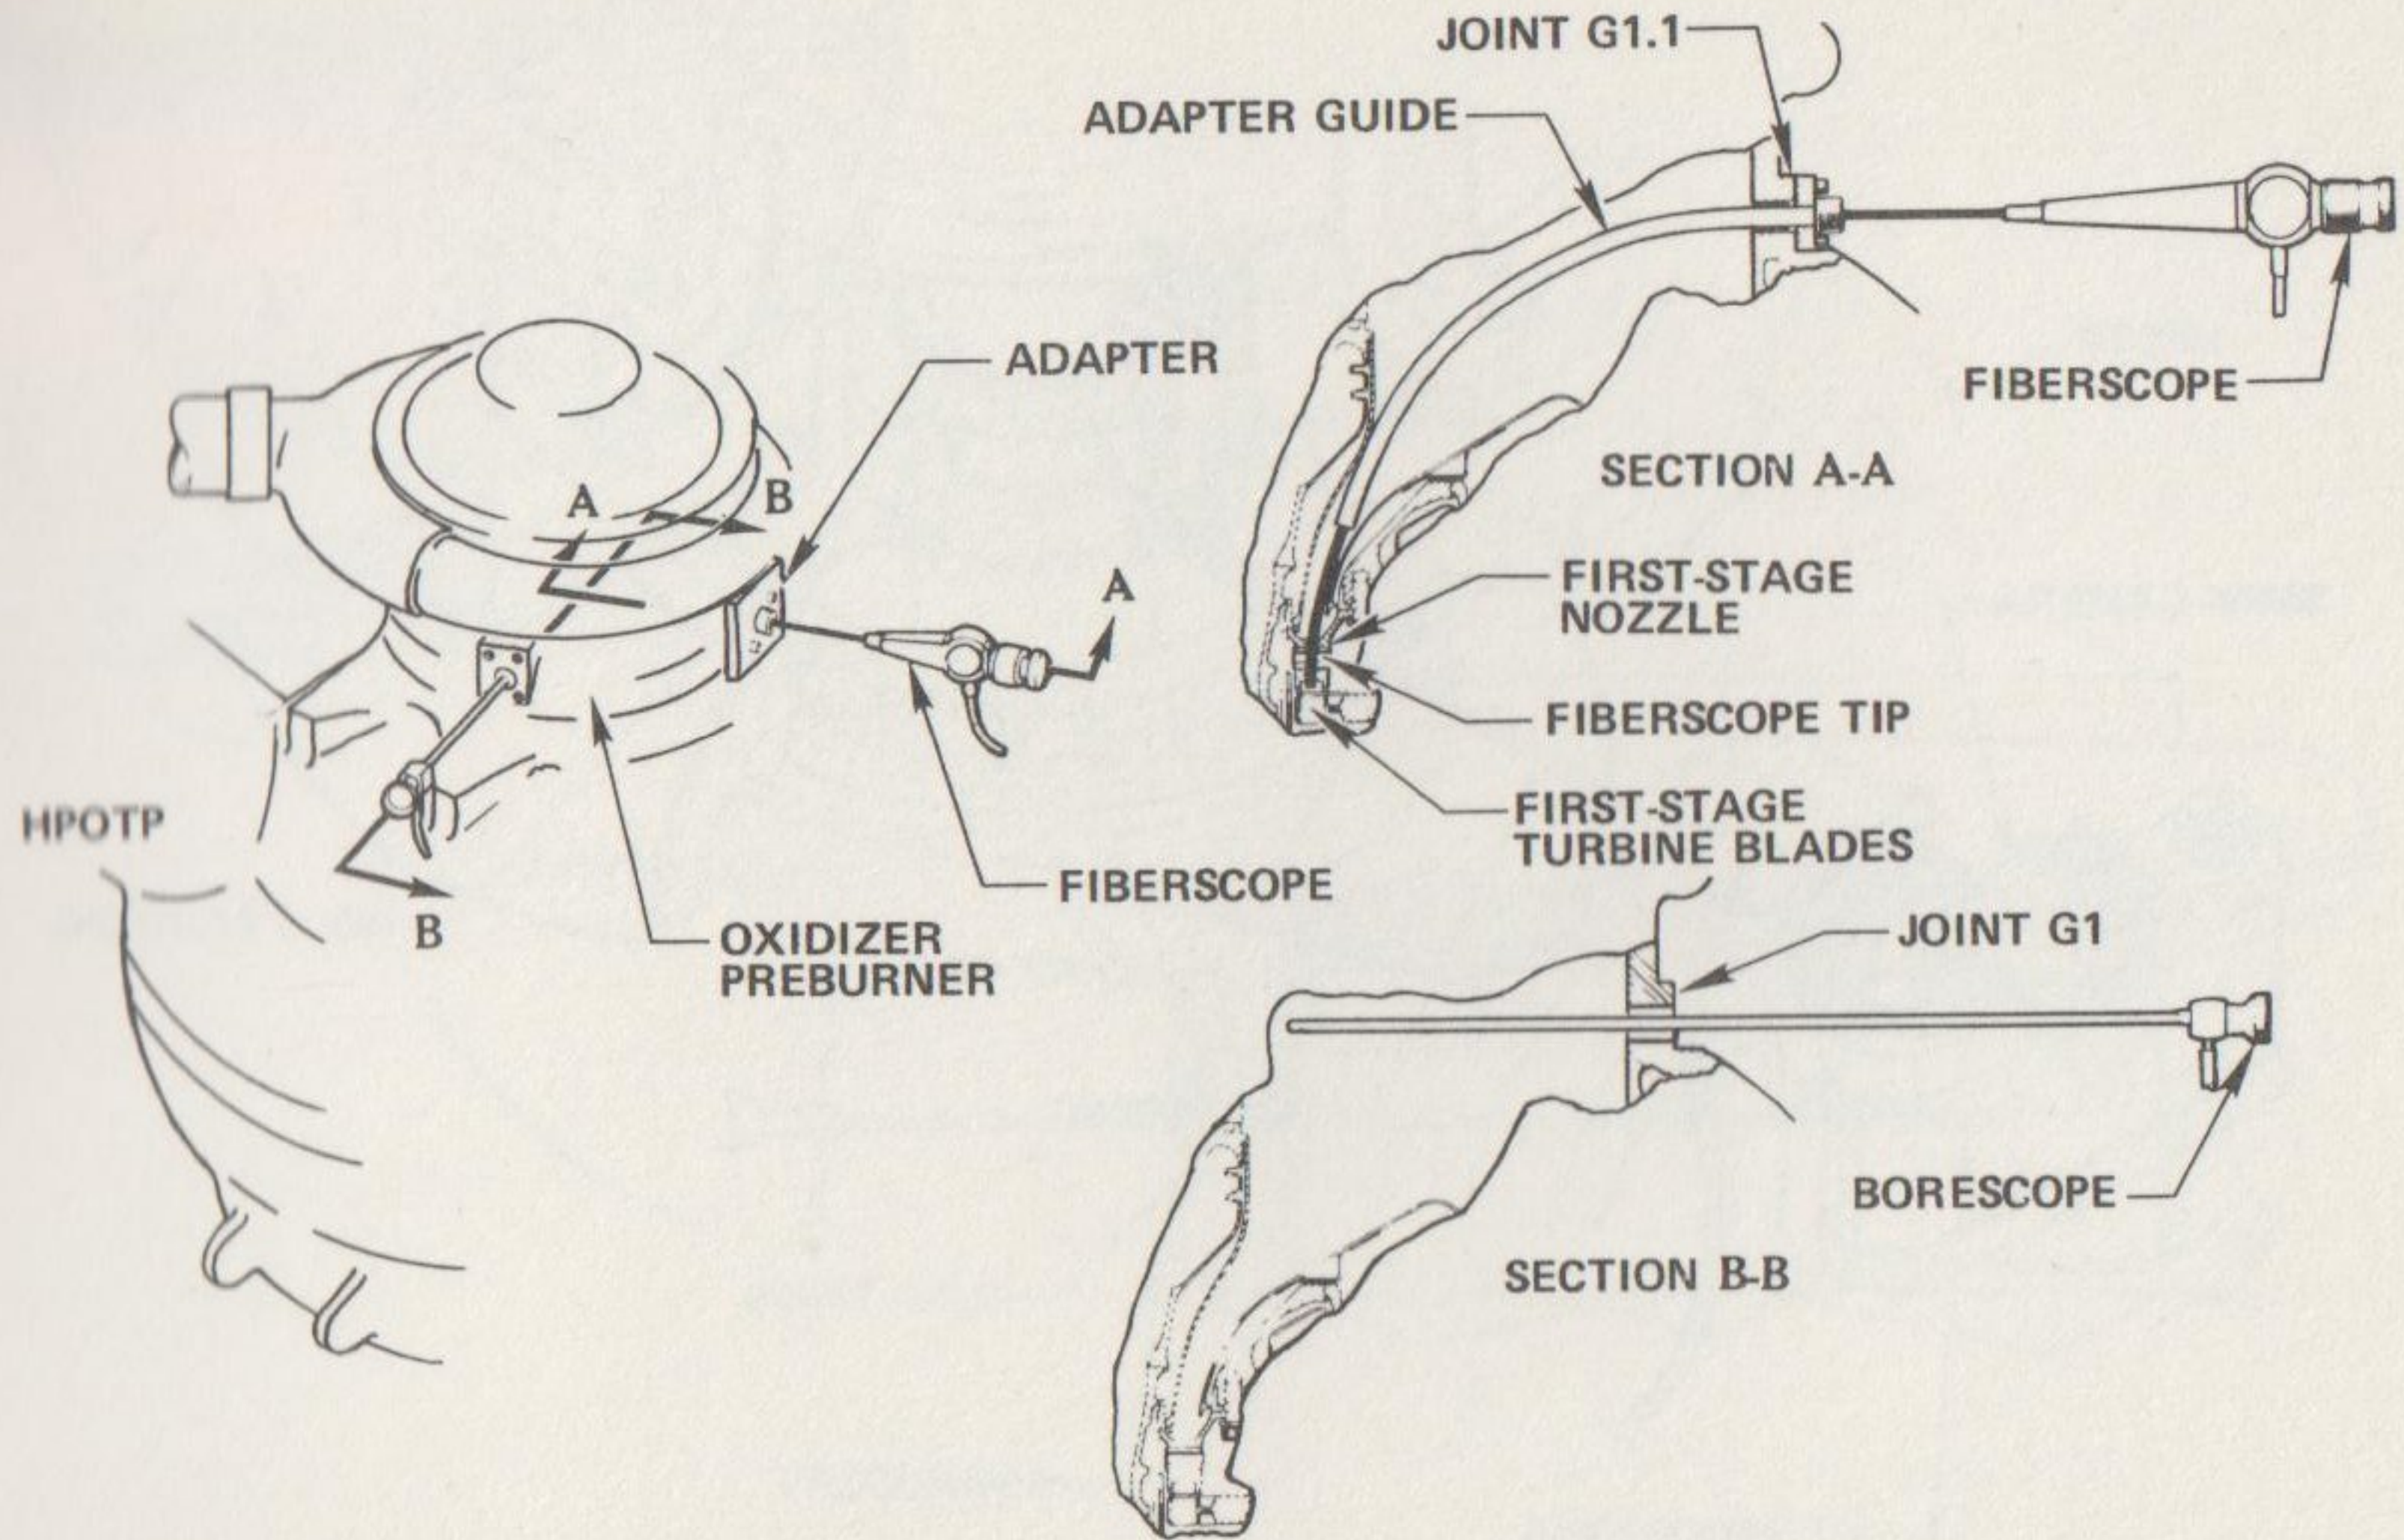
HPOTP FIRST-STAGE TURBINE BLADES/NOZZLE INSPECTION
